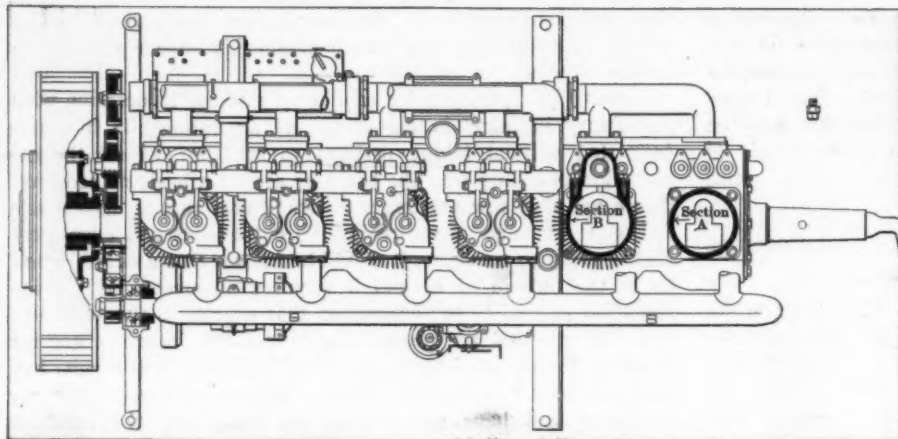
Looking down on the six-cylinder type of motor showing two of the cylinders in section
